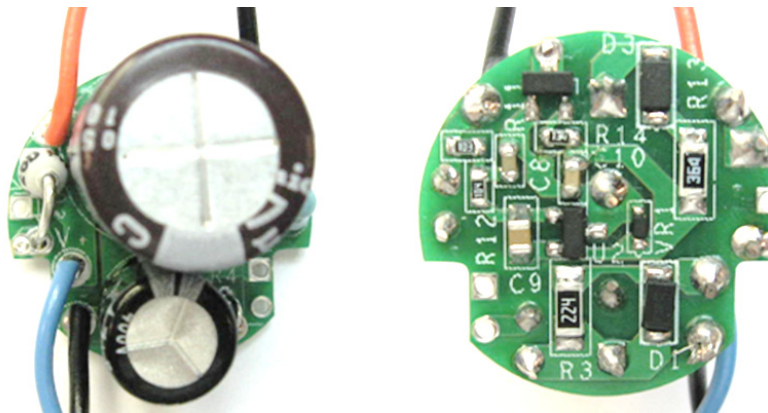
Buck-Boost Board B, Top and Bottom Side.
